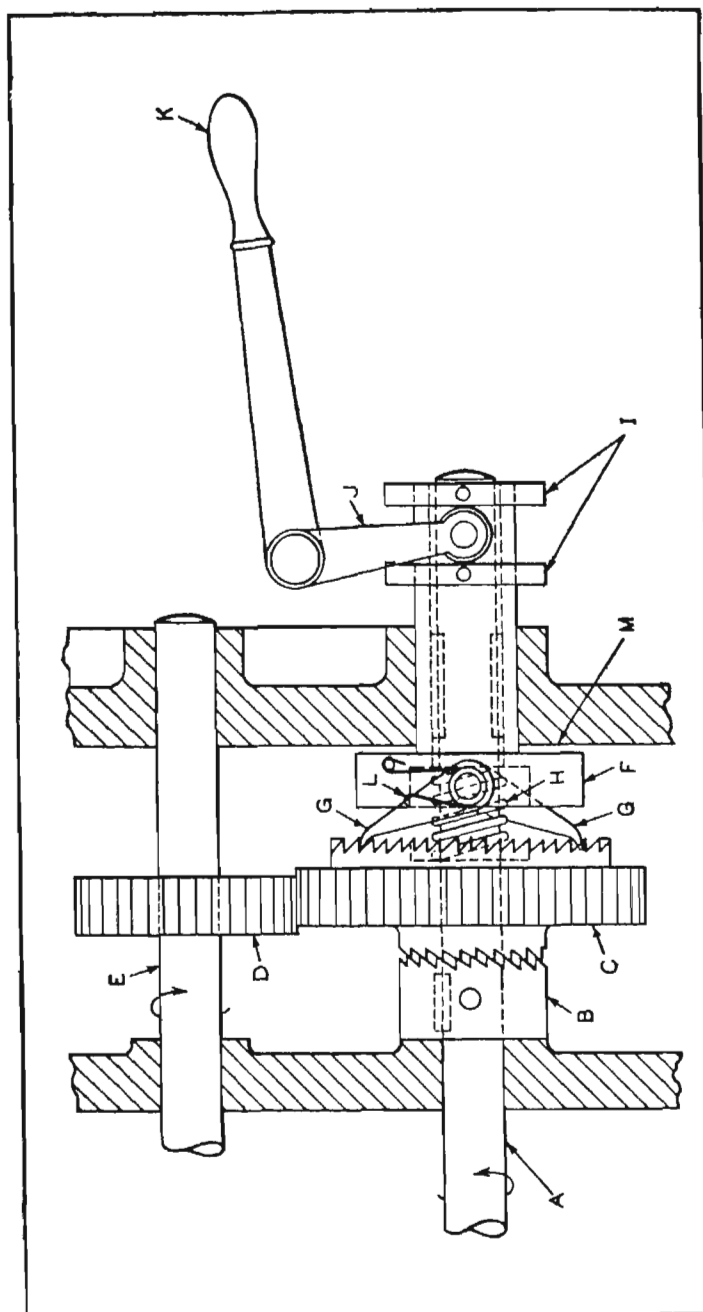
Mechanism which Permits Driven Shaft E to be Advanced Ahead of Driving Shaft A by Means of Hand-lever K.
